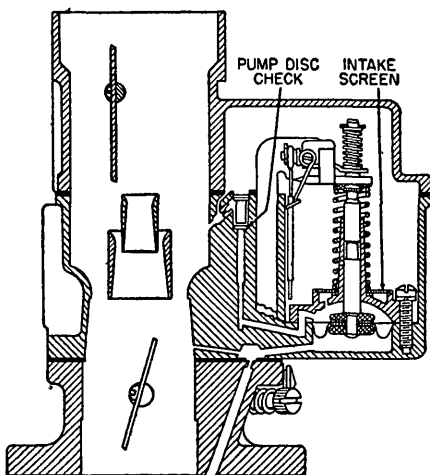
E Accelerating pump circuit of Carter YF carburetor used on Willys and Henry J
